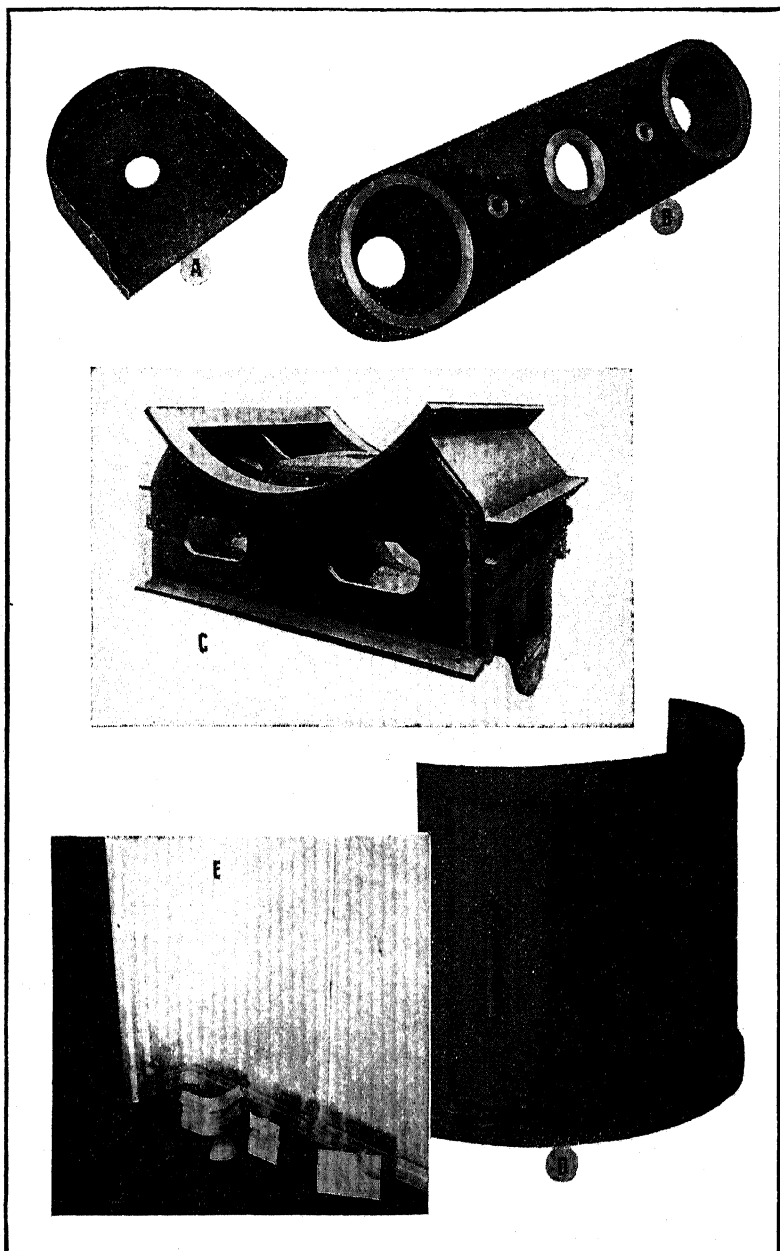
COVERS—(A) Disc saw guard. (B) Gearbox for road grader. (C) Locomotive smokebox saddle. (D) Cover for pulverizer mill. (E) Milk cooler cover showing stampings which are welded in to give vee'd groove.
